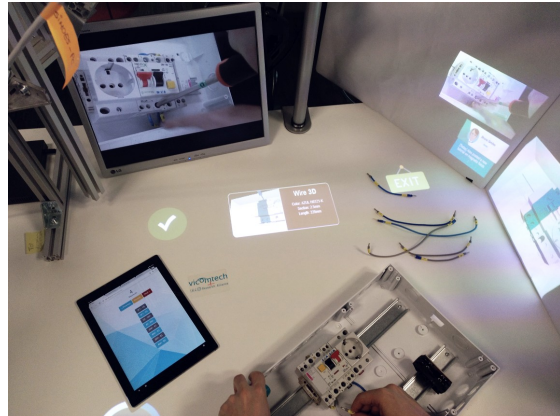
Assembly operator assistance set-up for electric cabinet wiring.
